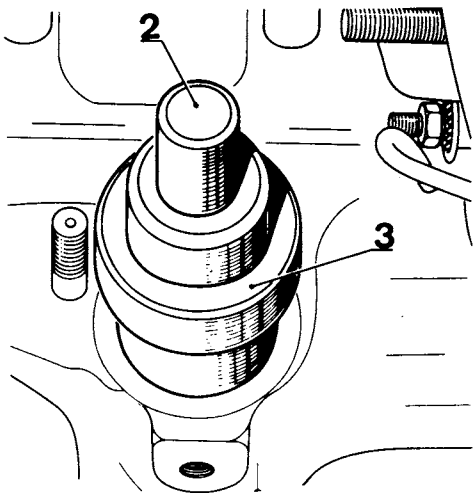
SLEEVE ASSEMBLY MANDREL
